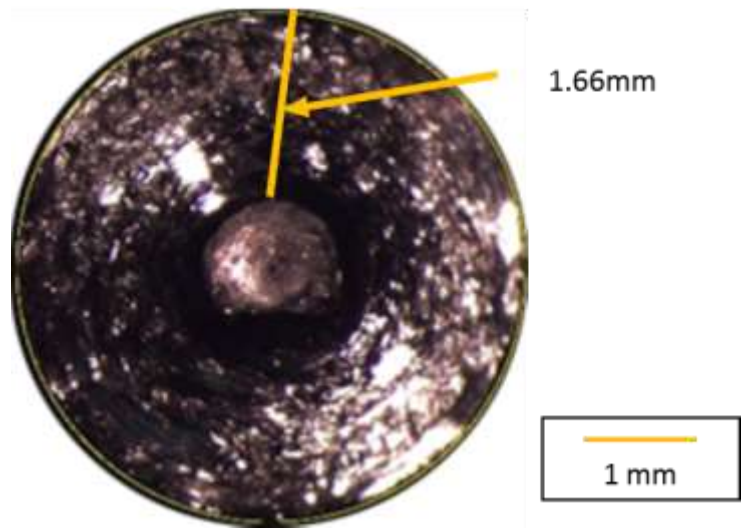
Optical microscopy images of “cut” surfaces using the bolt-cutting technique
